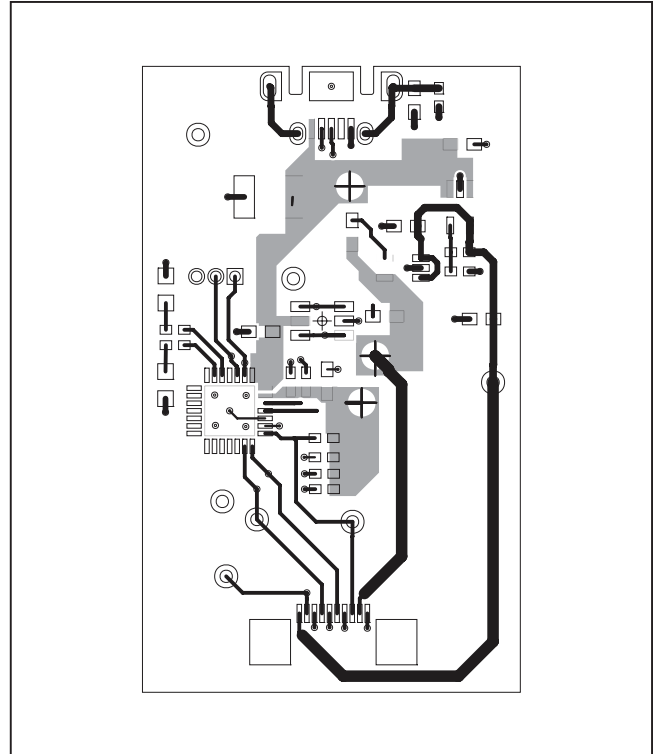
USBOSMB Mother Board PCB Layout—Component Side
